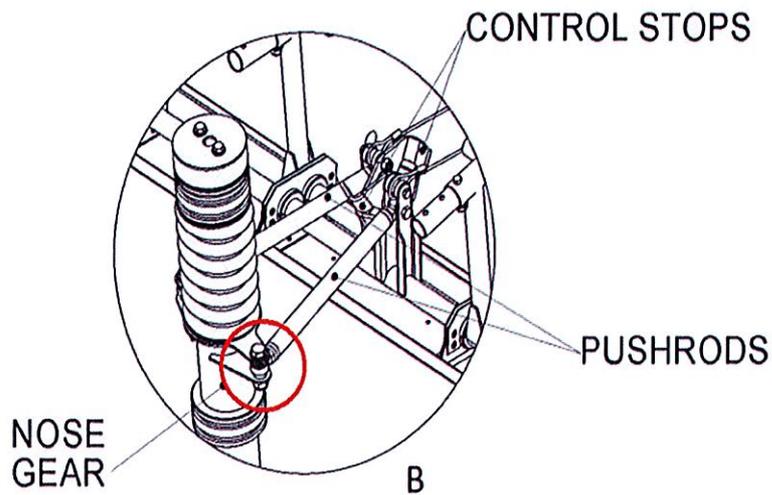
Illustrates the AN5 bolt to be removed, disconnecting the pushrod. No adjustments should be made to the pushrod and/or eyebolt.
